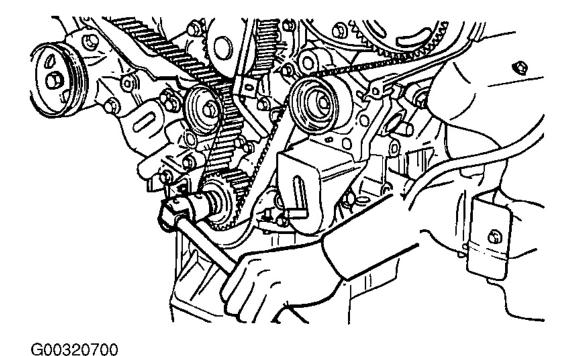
Exerting The Reverse-Directed Force To The Right Bank Exhaust Camshaft Sprocket Courtesy of KIA MOTORS AMERICA, INC.
